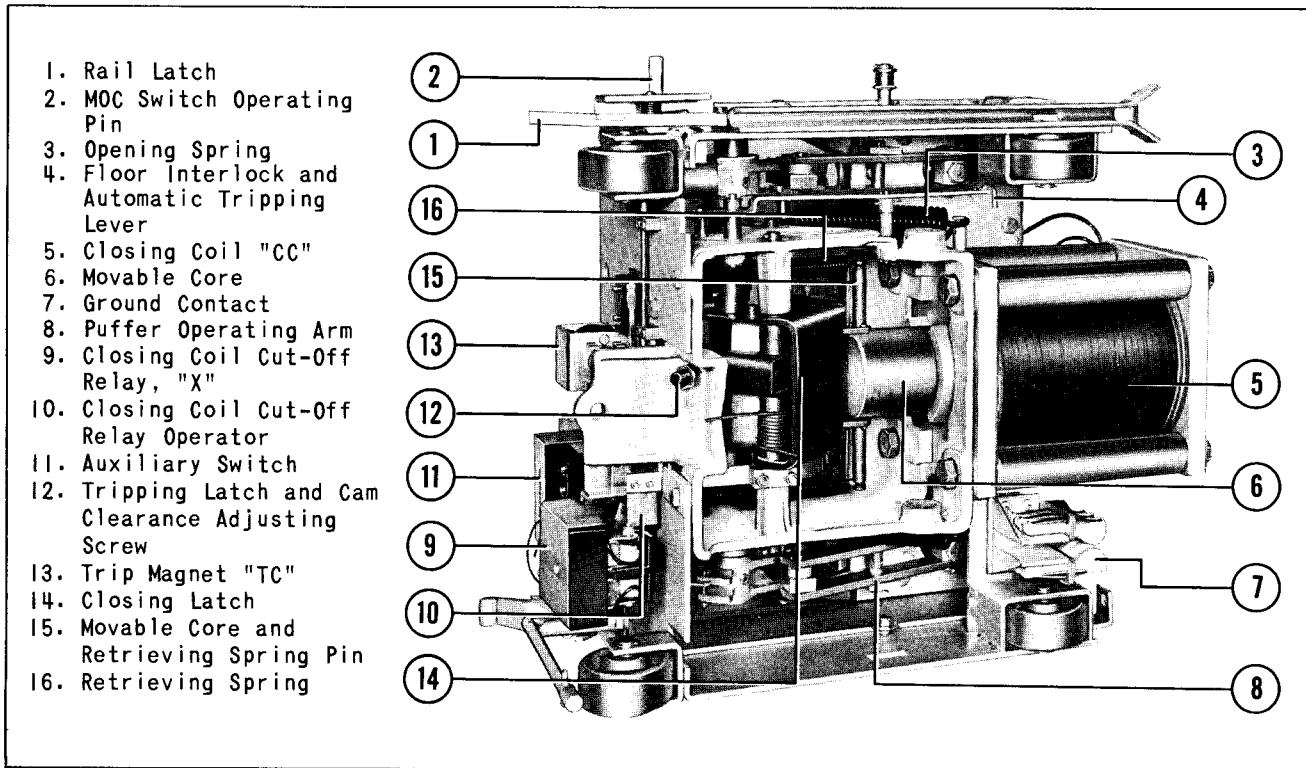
Bottom View of a 4.16 KV Breaker with Solenoid Mechanism
